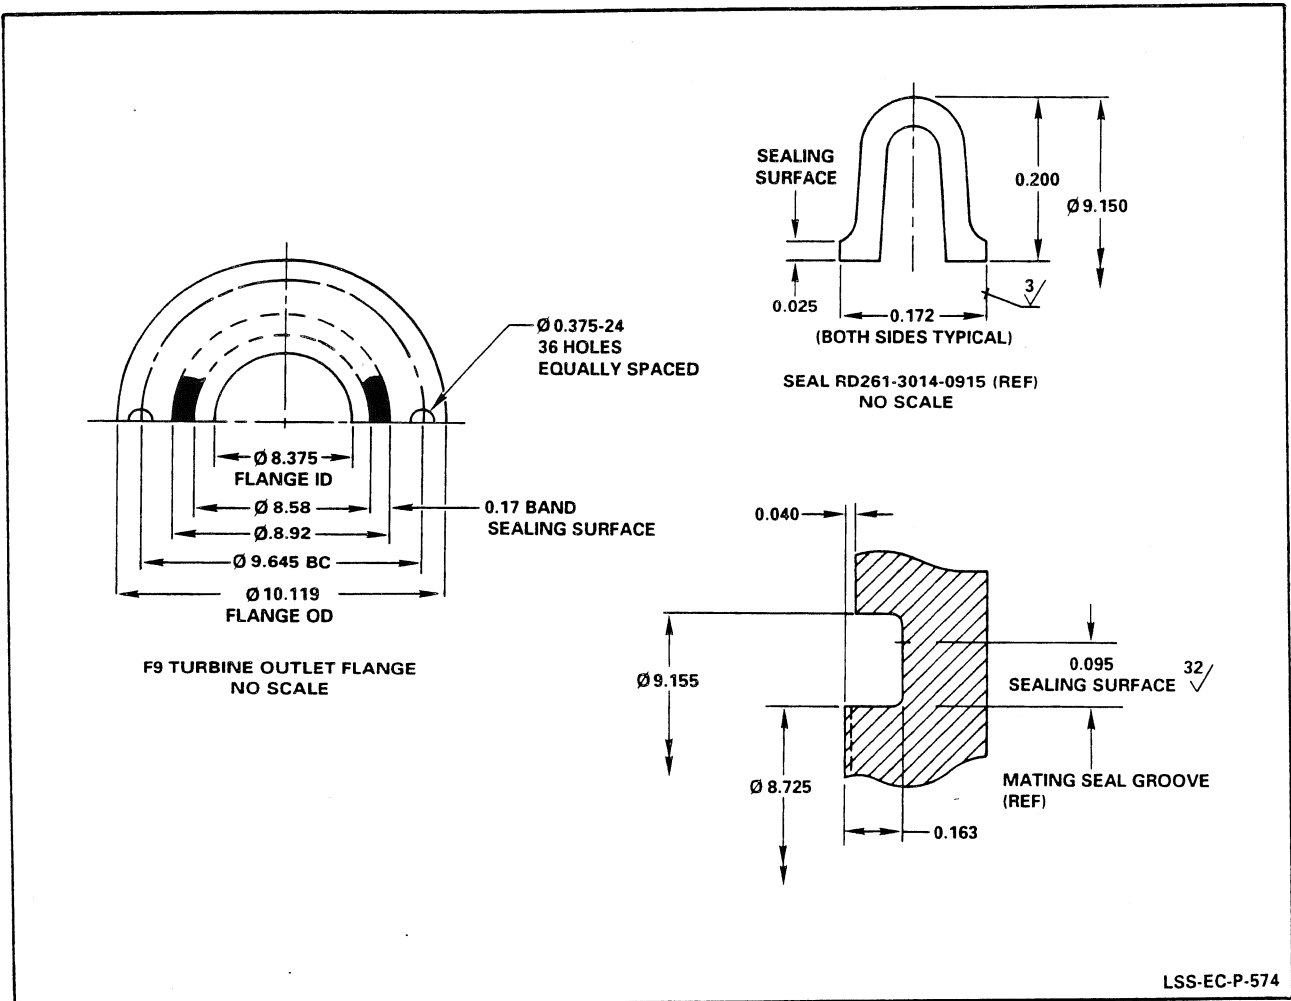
F9 Turbine Discharge Flange Sealing Surfaces
